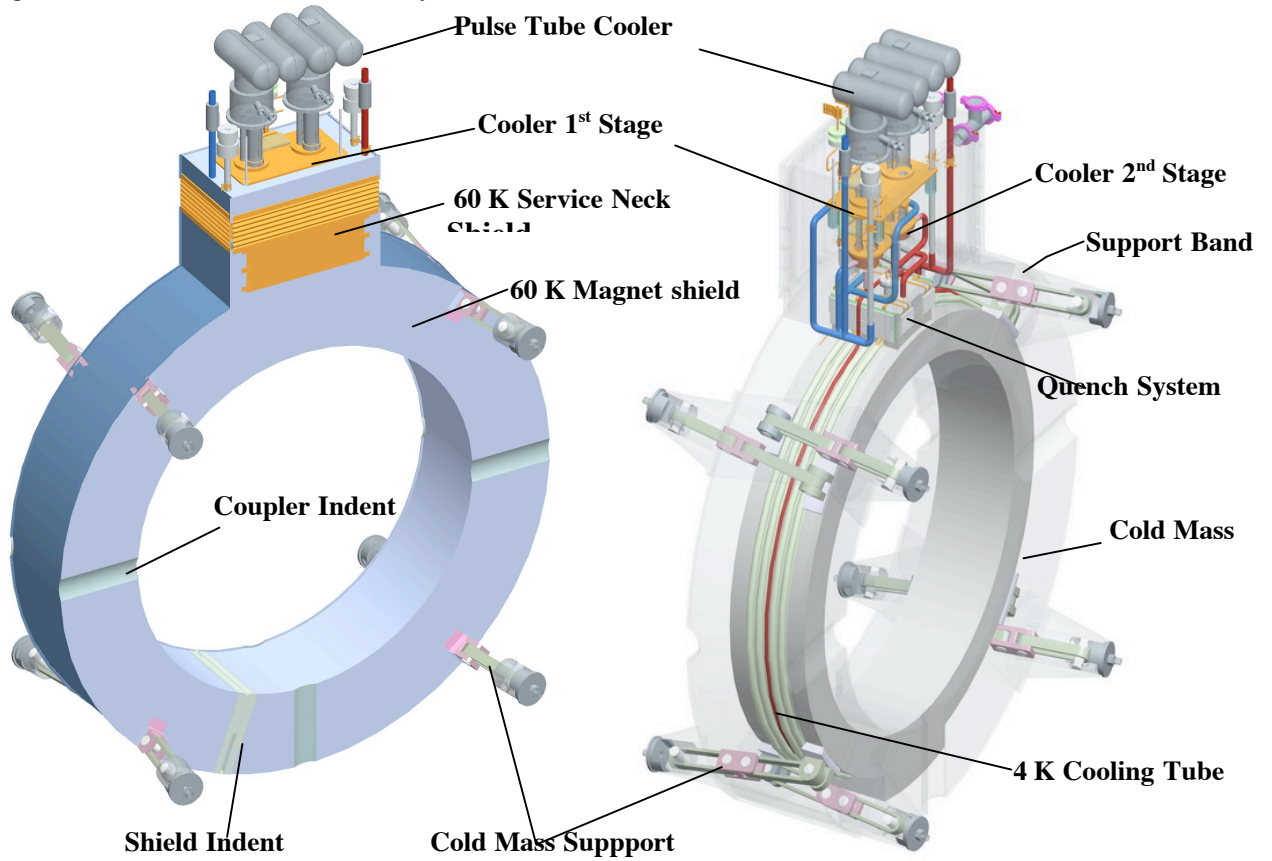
A 3D view of MICE coupling magnet cold Mass assembly and the 60 K thermal shield assembly
